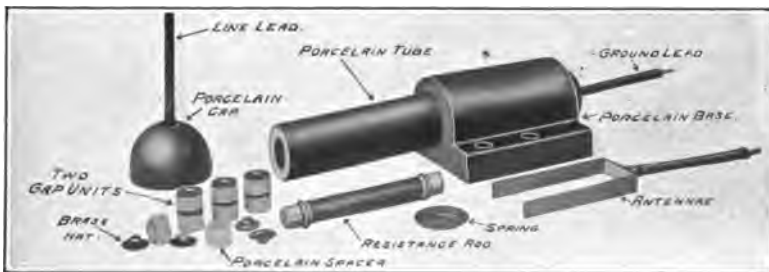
DETAILED CROSS-SECTION OF ARRESTER.
